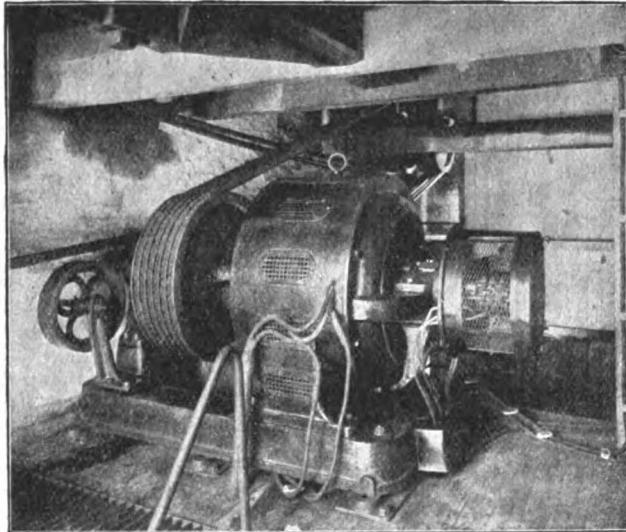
120-H.P. MOTOR DRIVING 6,000 SPINDLES.
